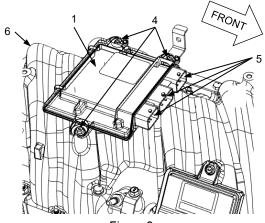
ECM (1), ECM Electrical Connector locations (5), ECM Mounting Bolts (4)
